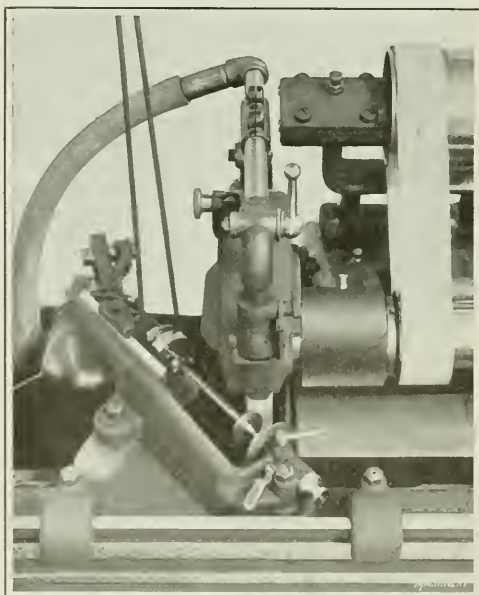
Attachment for grinding Valve Faces; the Valve is held at the Required Angle and is revolved on Dead Centers
